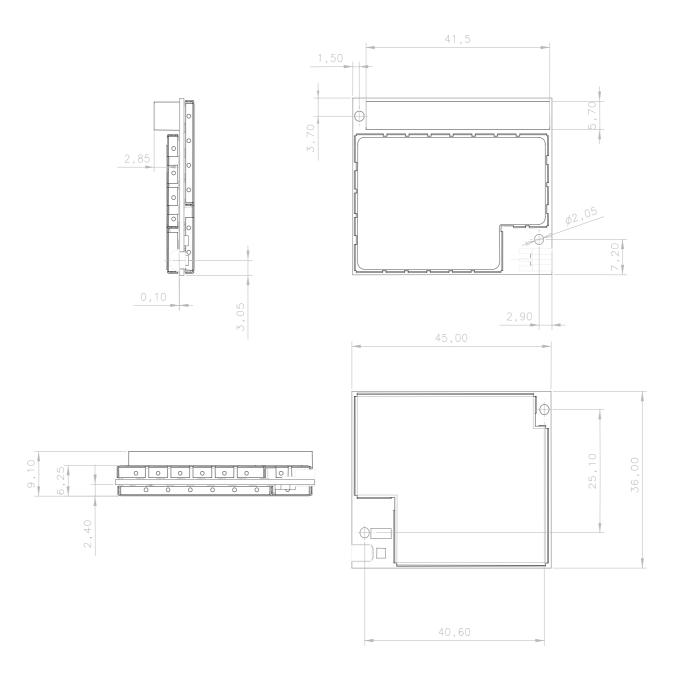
Detailed physical dimensions of the Nokia 12 GSM module (in millimetres)
